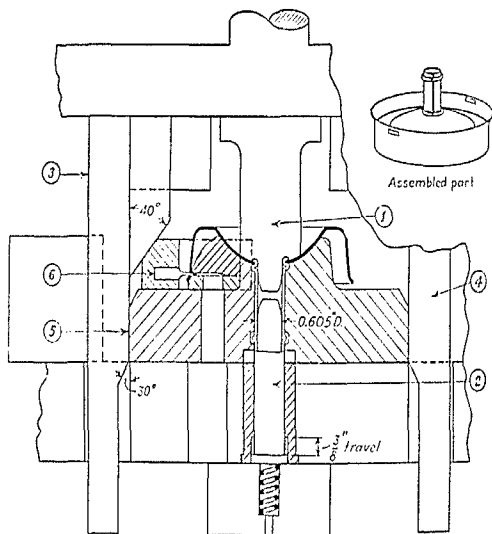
Assembling by curling. (Toledo Pressed Steel Co.)
